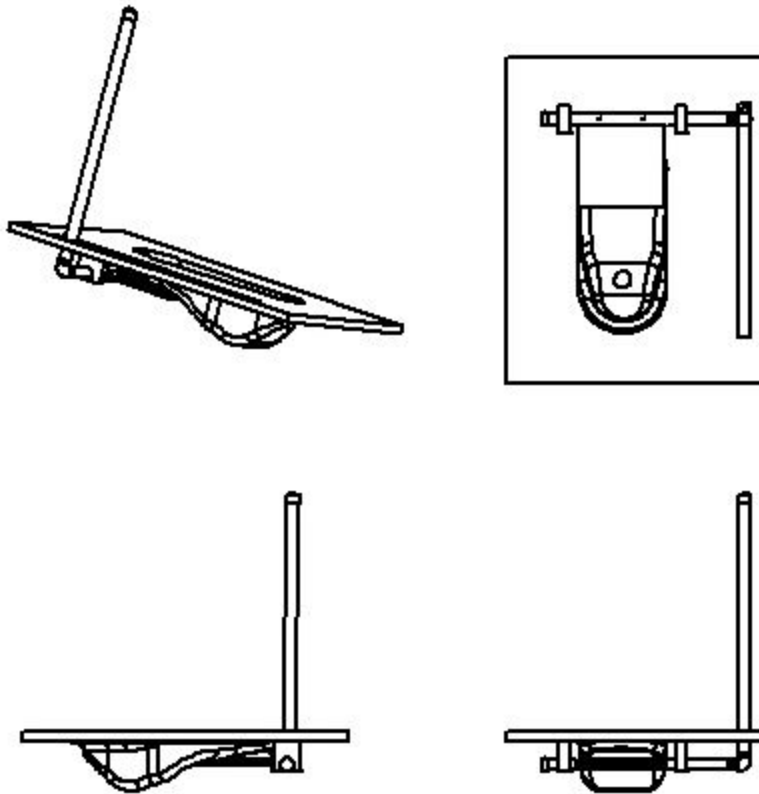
Pan, frame, and lever mechanism assembly drawing. From left to right, top to bottom: iso, bottom, left, back.
